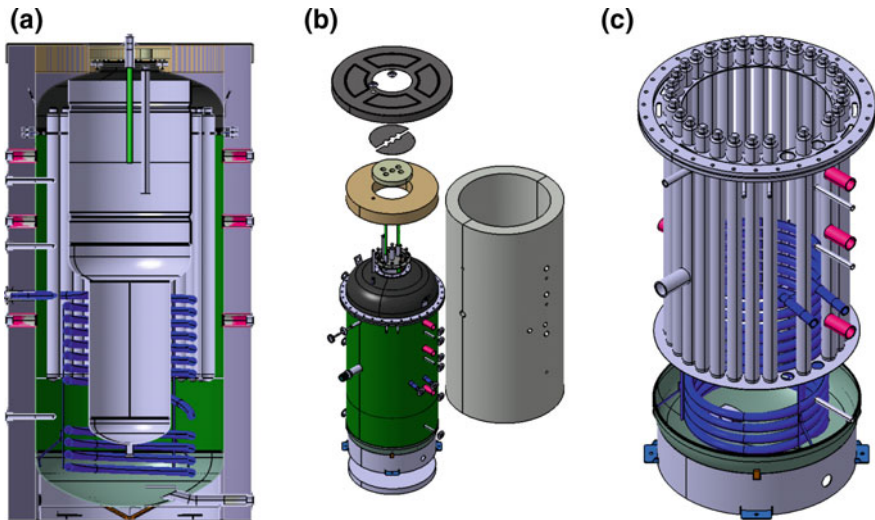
Rendering of the designed tank-in-tank storage: longitudinal section (a), three-dimensional complete view (b) and three-dimensional detail of the integrated PCM macro-capsules (c)
